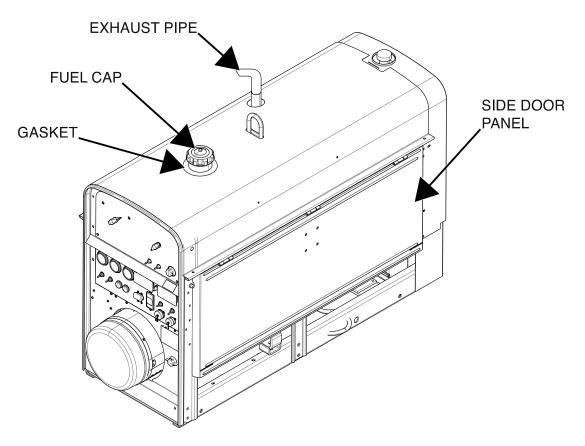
Exhaust pipe, fuel cap and gasket locations
